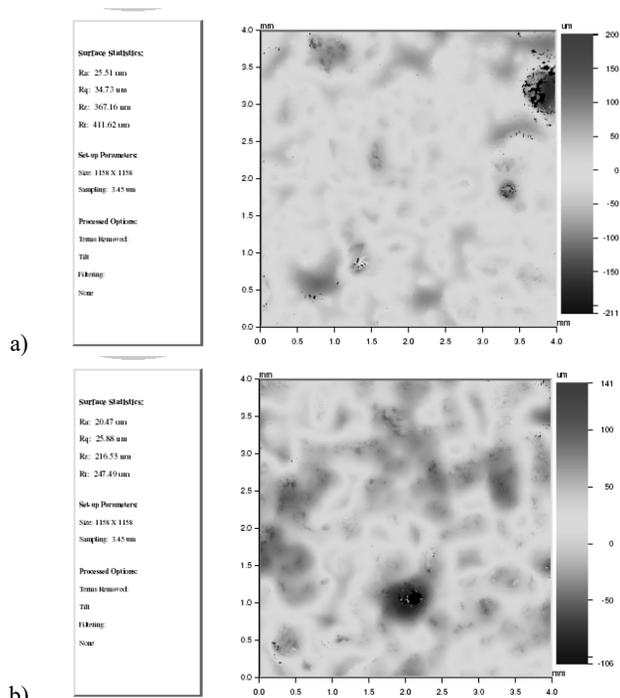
Visualization of the surface geometry of casting made in mould of: O type - a), S type - b)
